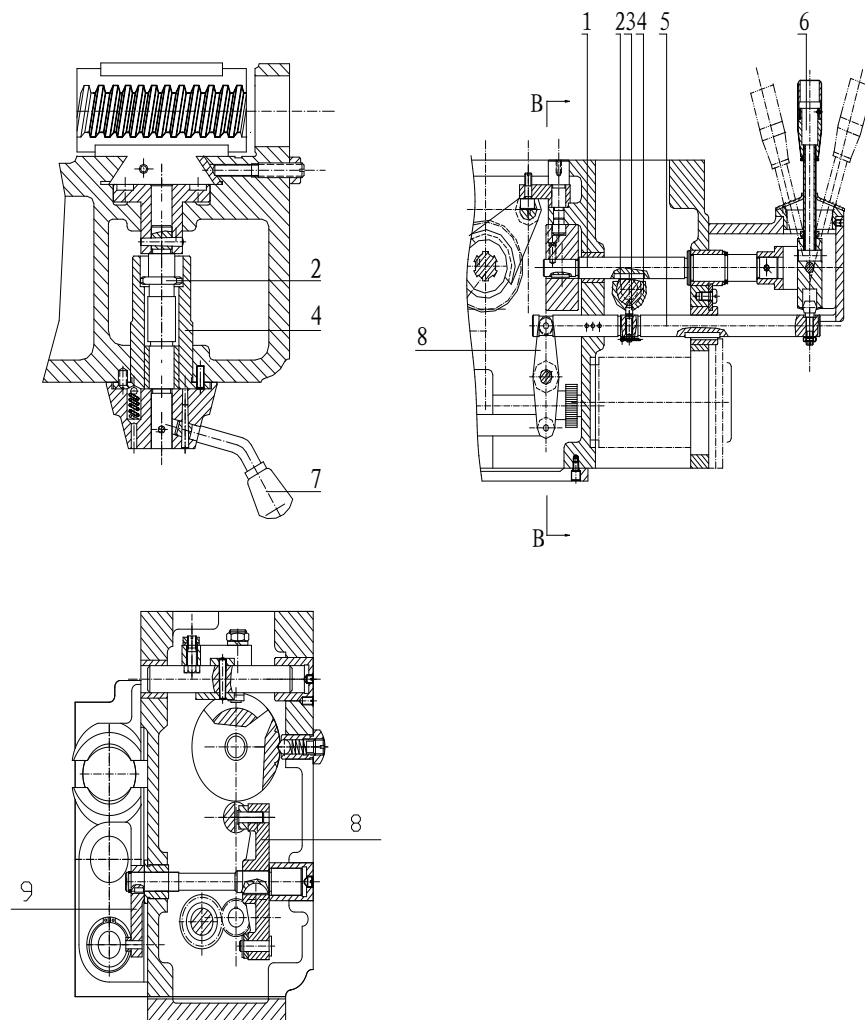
Interlocking mechanism of limit touch-stop feed rod and leadscrew.
